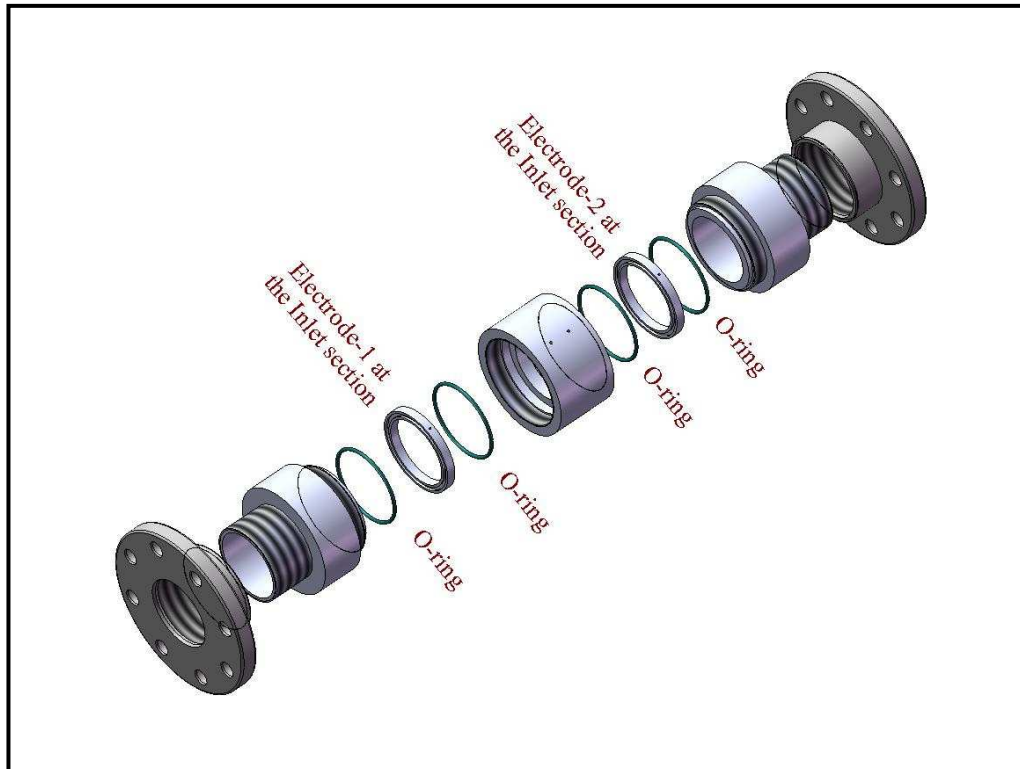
Assembly parts of the conductance inlet void fraction meter (CIVFM)
